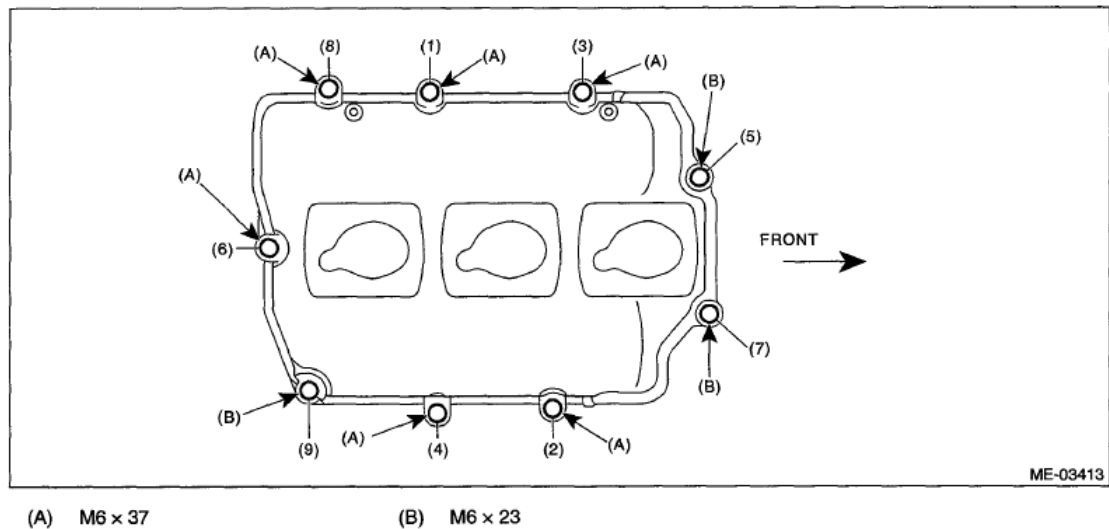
Identifying Rocker Cover Bolts Tighten Sequence (RH Side)
